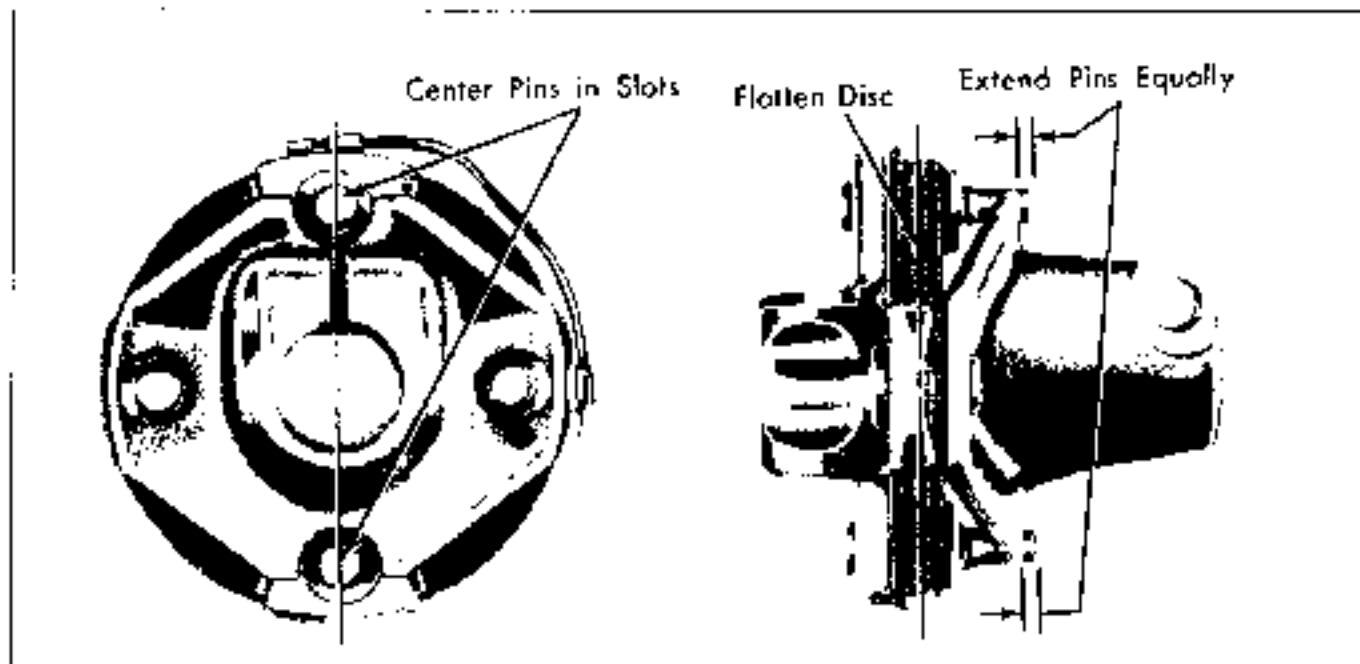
Installing Steering Shaft to Flexible Coupling
